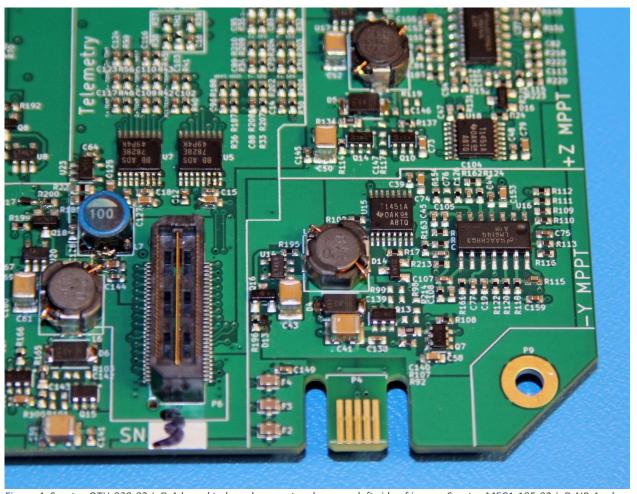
Samtec QTH-030-02-L-D-A board to board connector shown on left side of image, Samtec MEC1-105-02-L-D-NP-A edge connector shown near middle of image with male portion of connector made of PCB material
